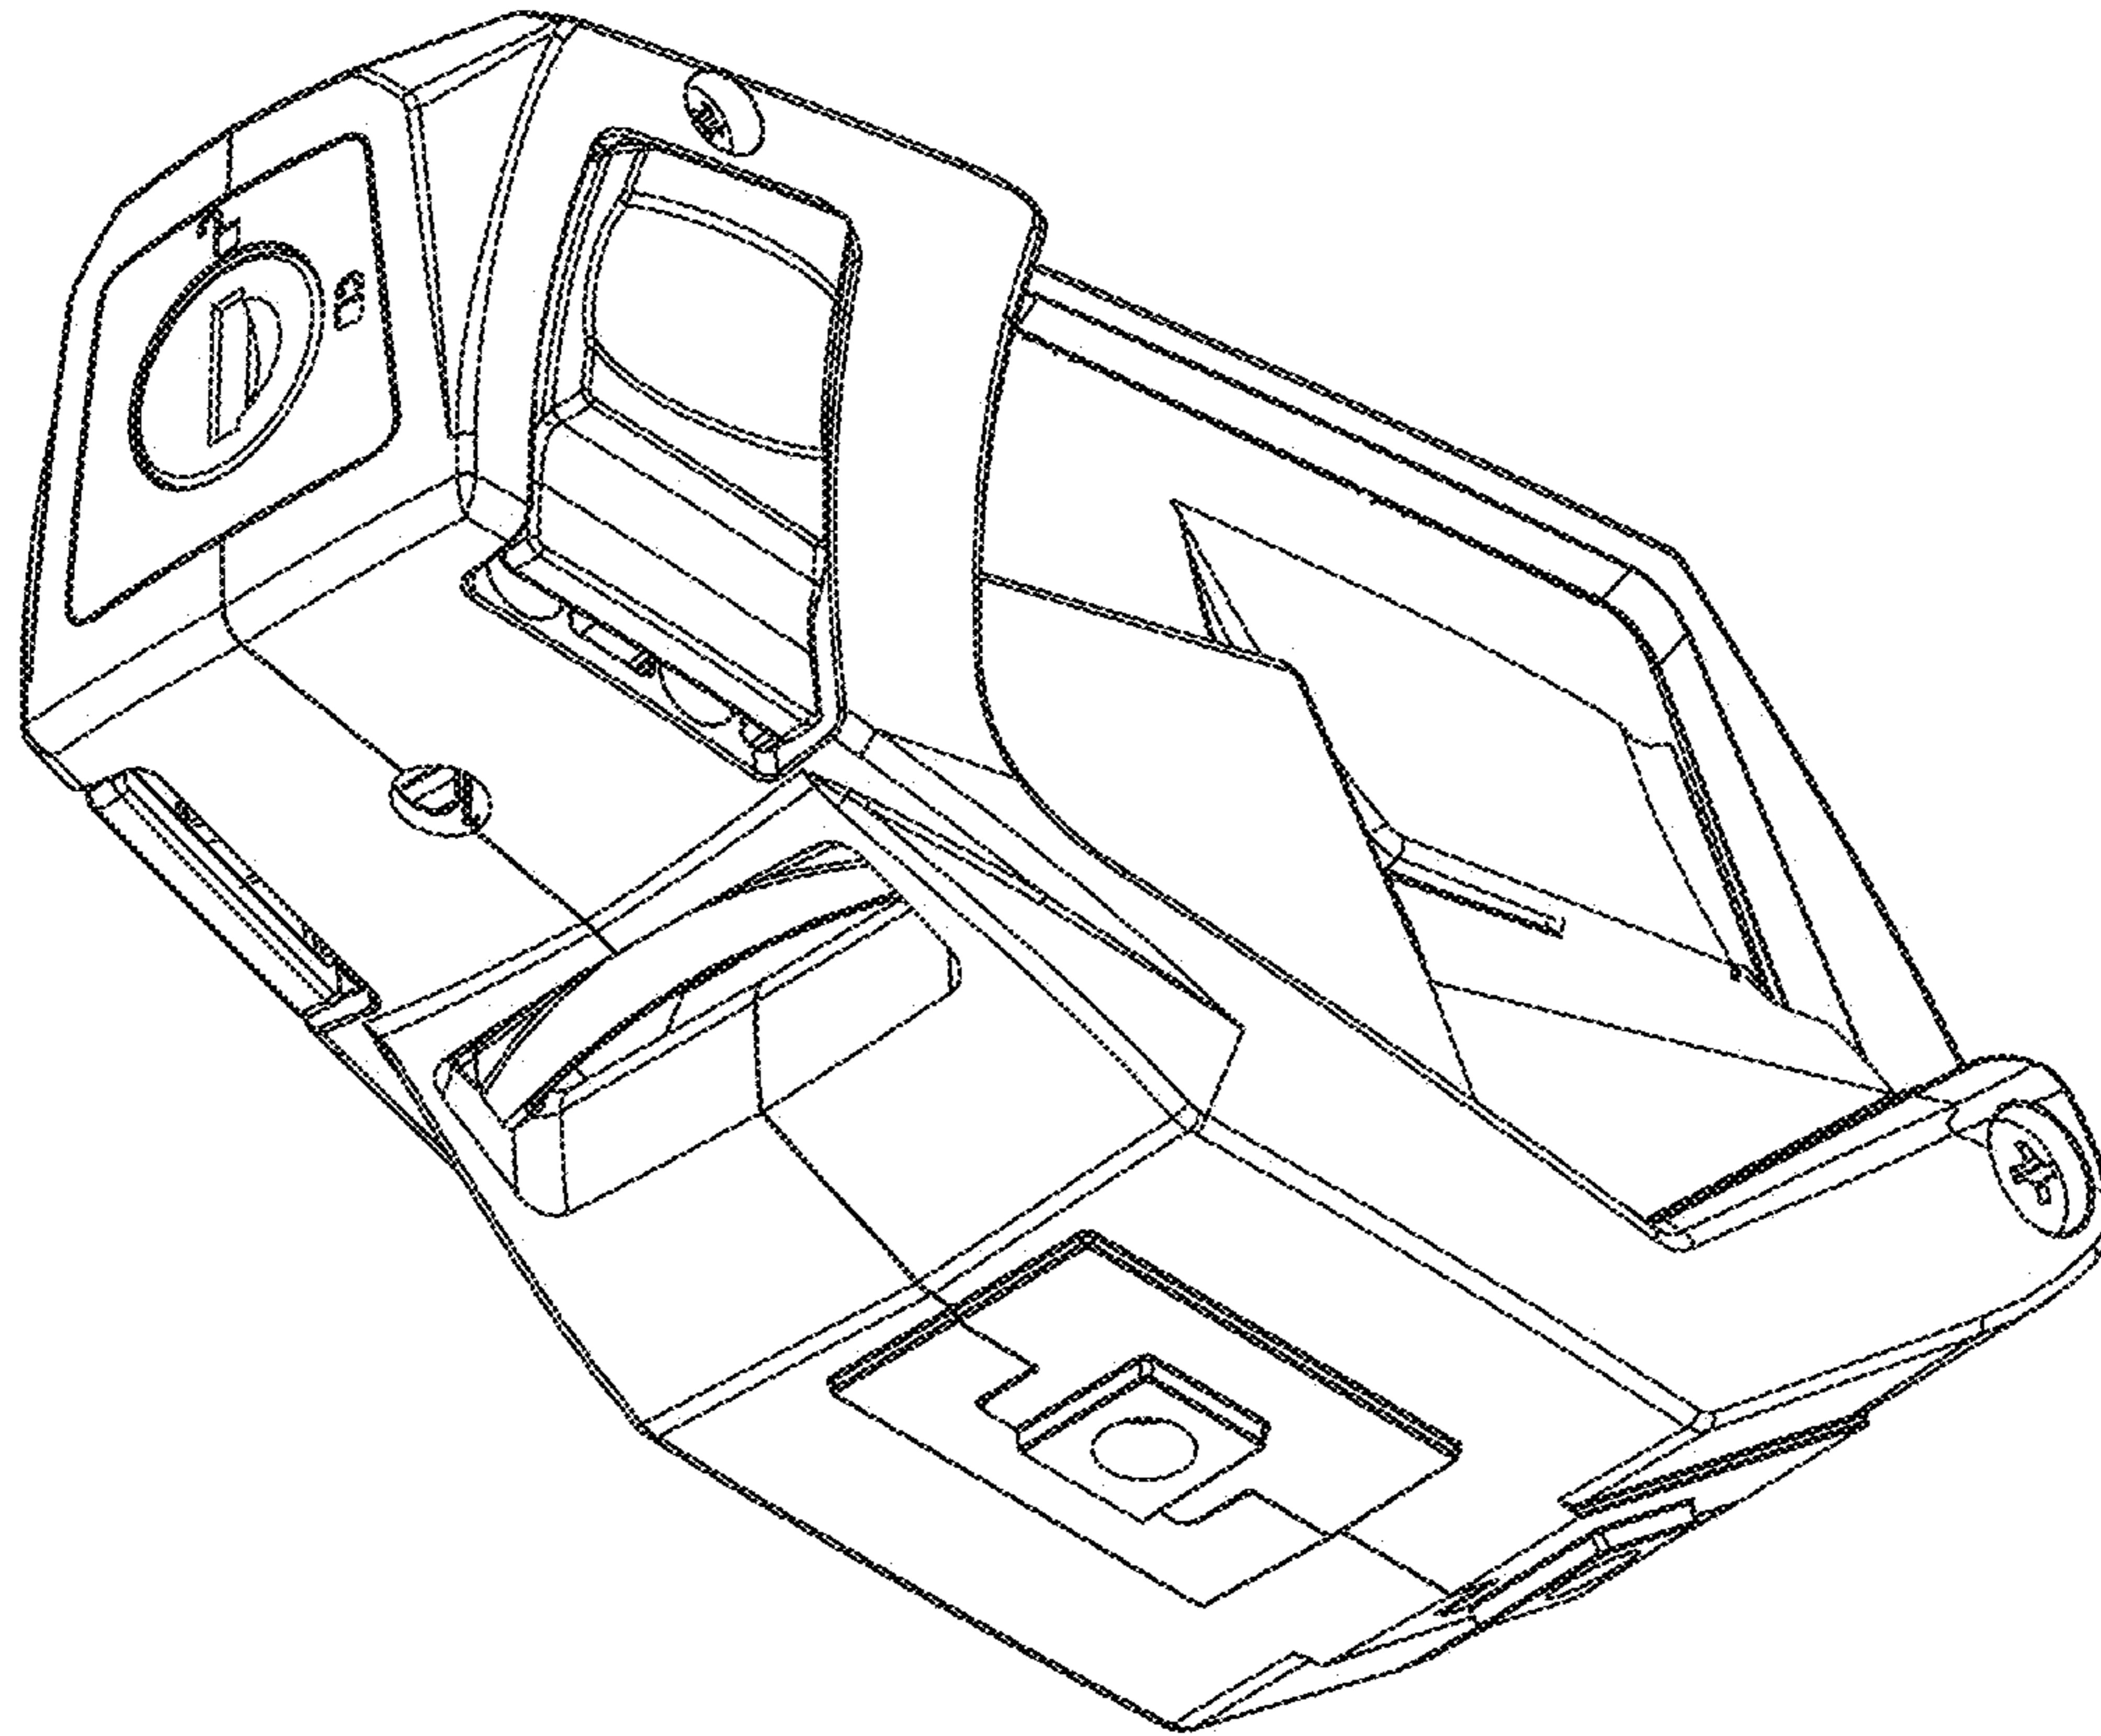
is a top right perspective view of a tool holder showing the new design;
